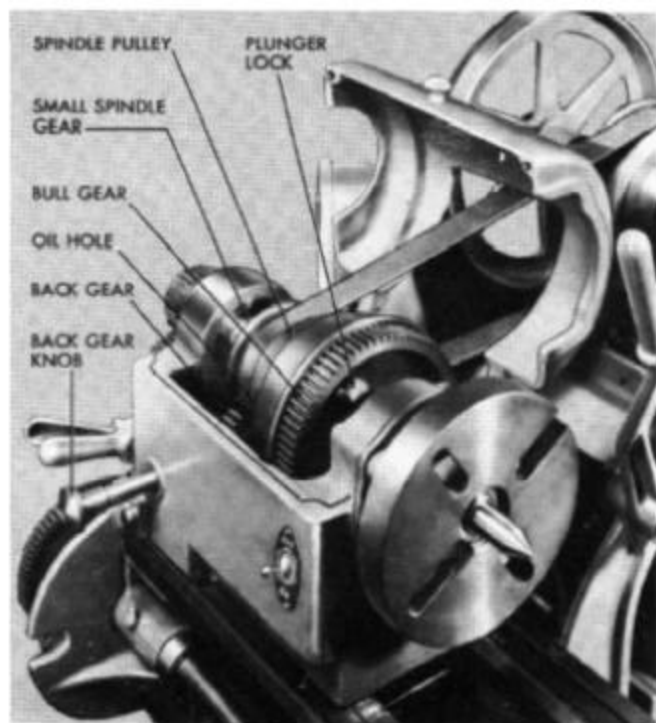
HEADSTOCK WITH PULLEY ARRANGEMENT
